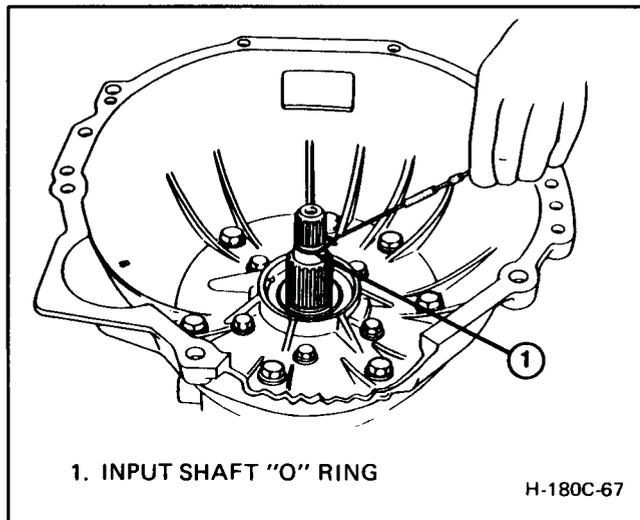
C-70 Installing "O" Ring Seal on Input Shaft
